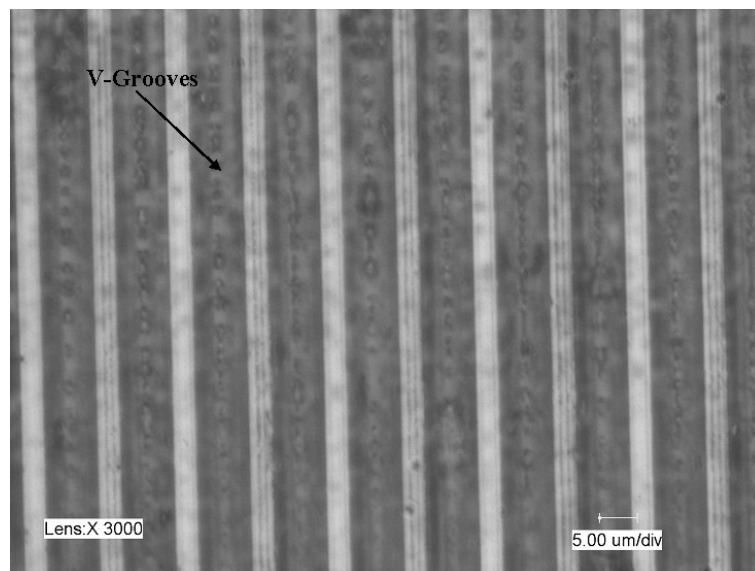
2-Dimensional Keyence image of Machined Surface
